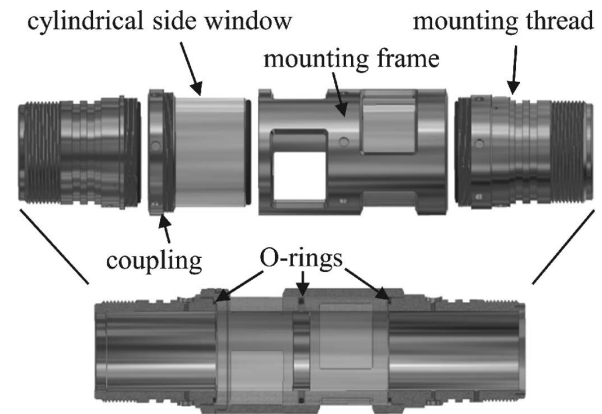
Current schematic design of the GeoKam side windows housing; top: exploding drawing, bottom: cross-section; joint between NiCr19NbMo and MgAl₂O₄ sealed with O-rings.
